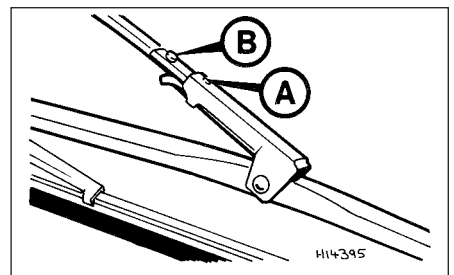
Tailgate wiper blade fixing (Sec 26)
